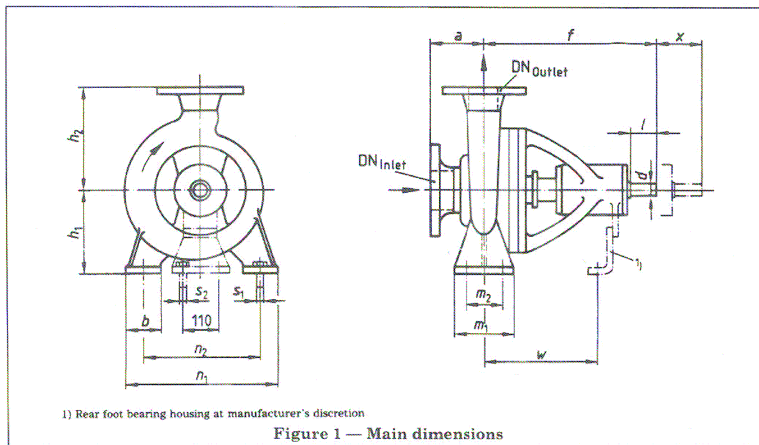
Extract from EN733 showing the standardised dimensions for pumps built to this standard.
